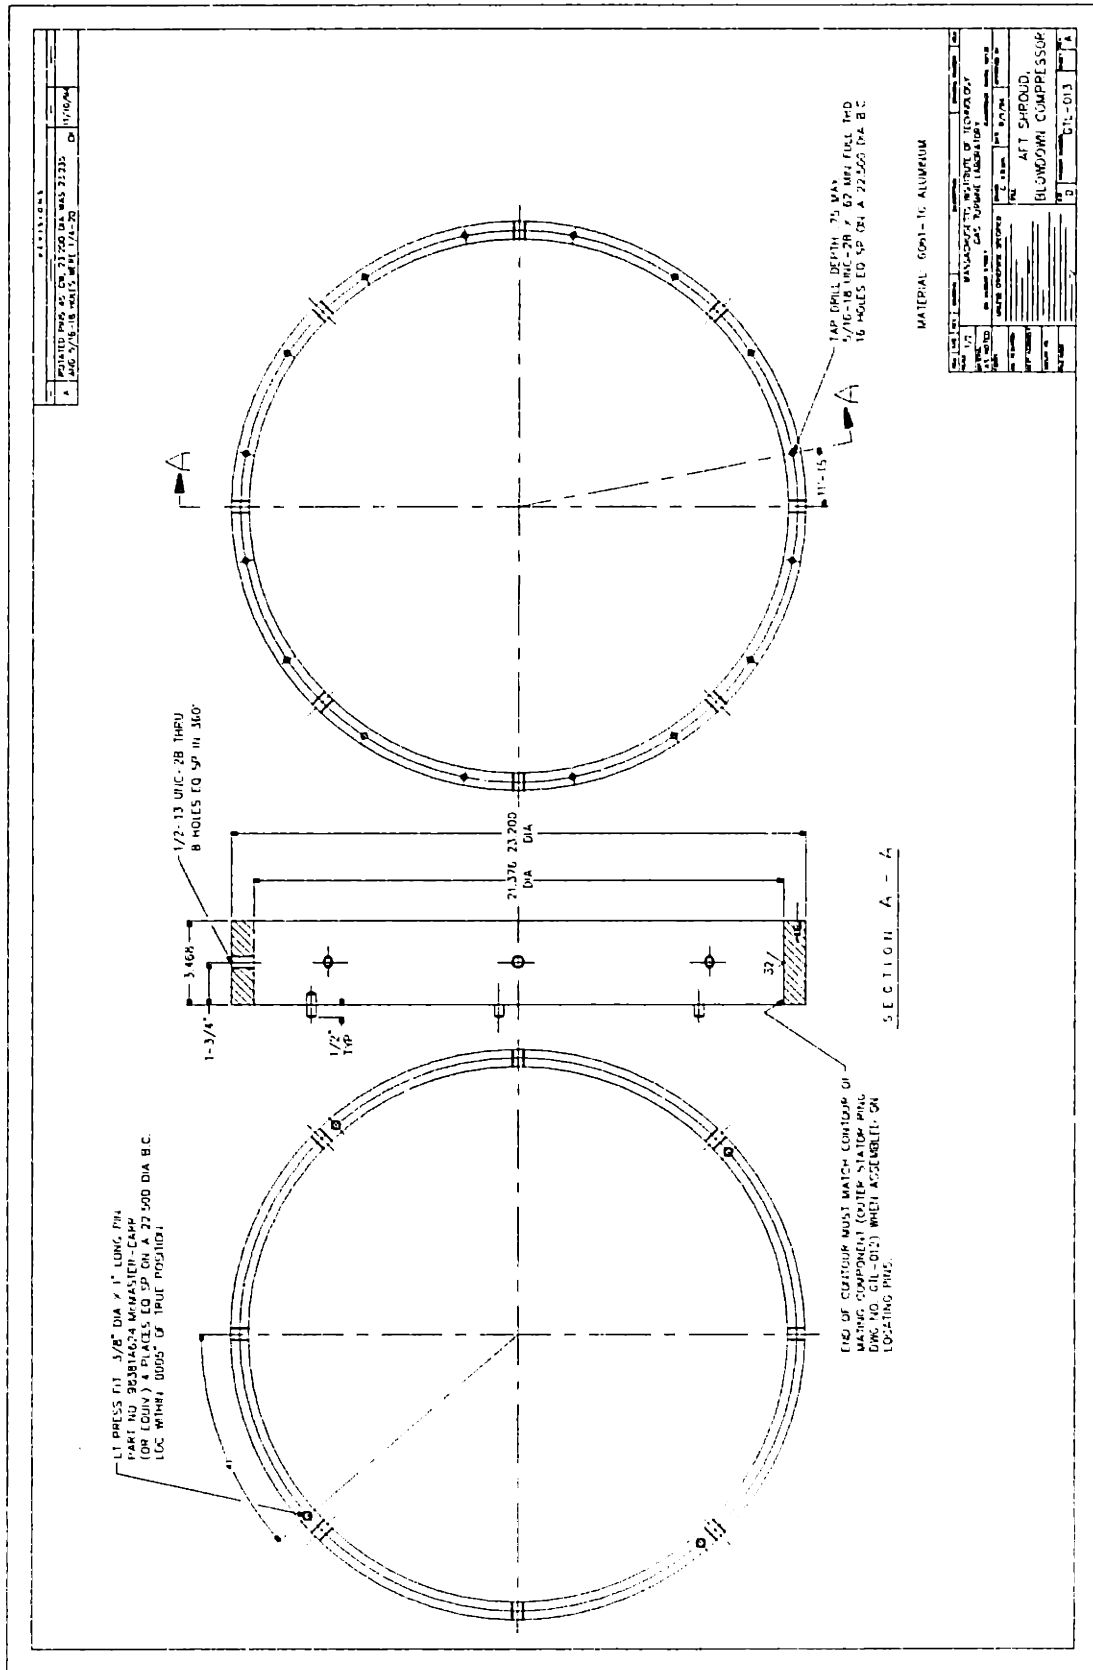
Fan stage drawing (GTL-013): downstream shroud section
